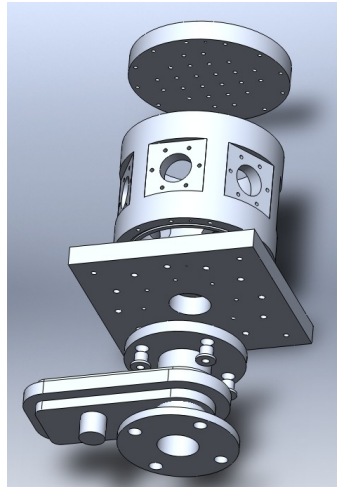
3D exploded view of the experimental chamber with the isolation valve.
